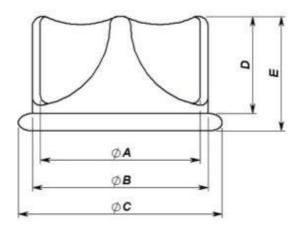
Schematic drawing of the technical specifications: VIVERE valve dimensions.
